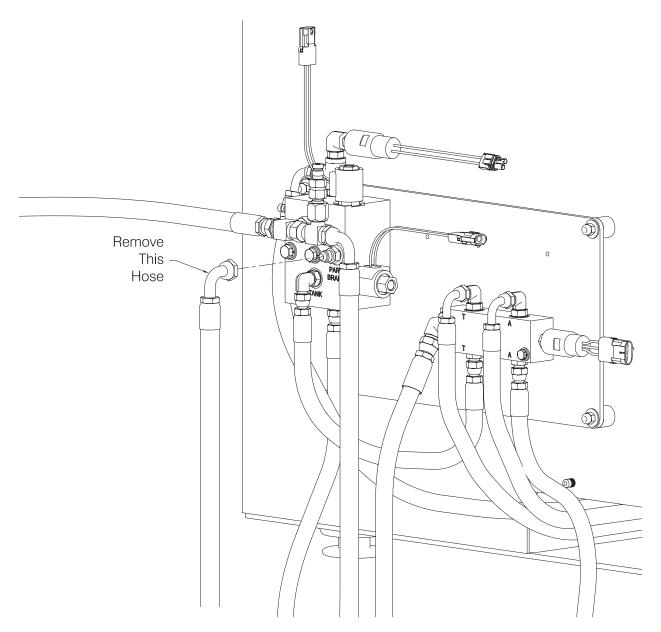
Brake Valve Mounted at Rear of Operator's Cab
